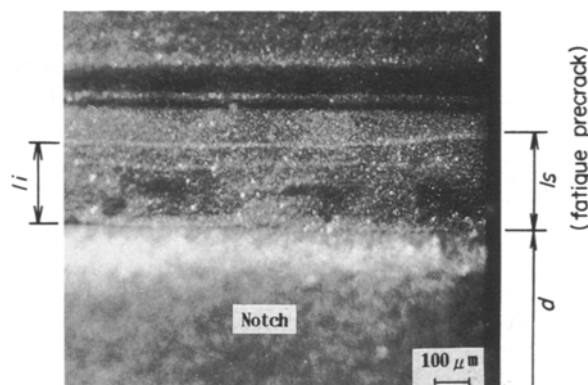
Fatigue precrack profile on fracture surface.  $P_{max} = 2.9$  kN.
